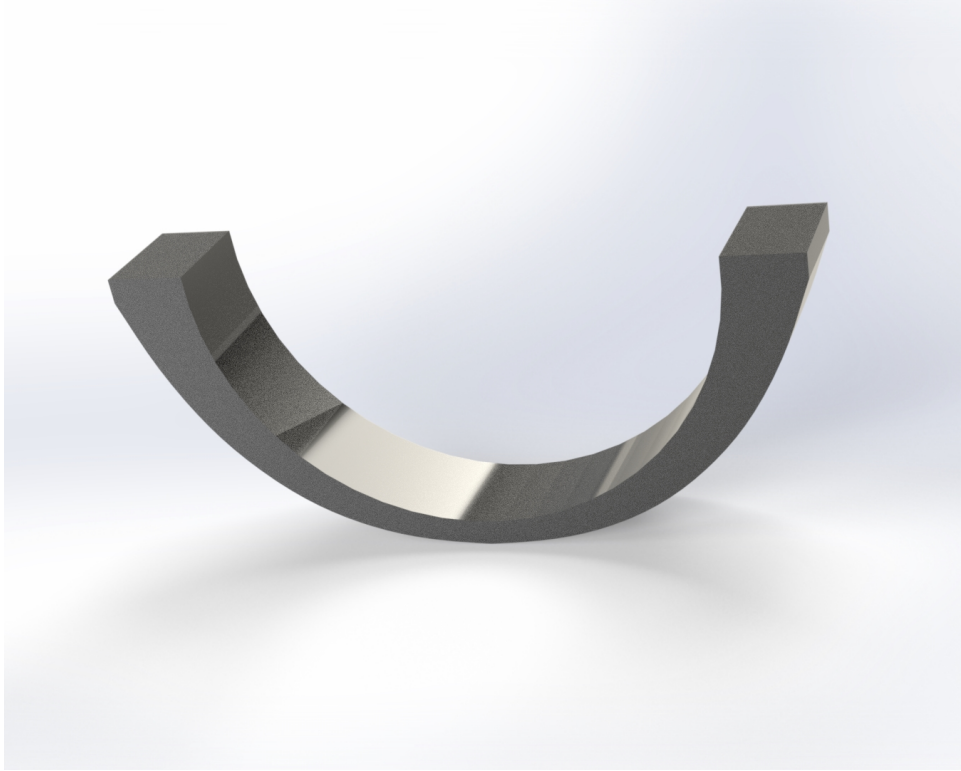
Rough CAD of supporting frame. Removed asymmetrical arch for easy measurement and estimations
